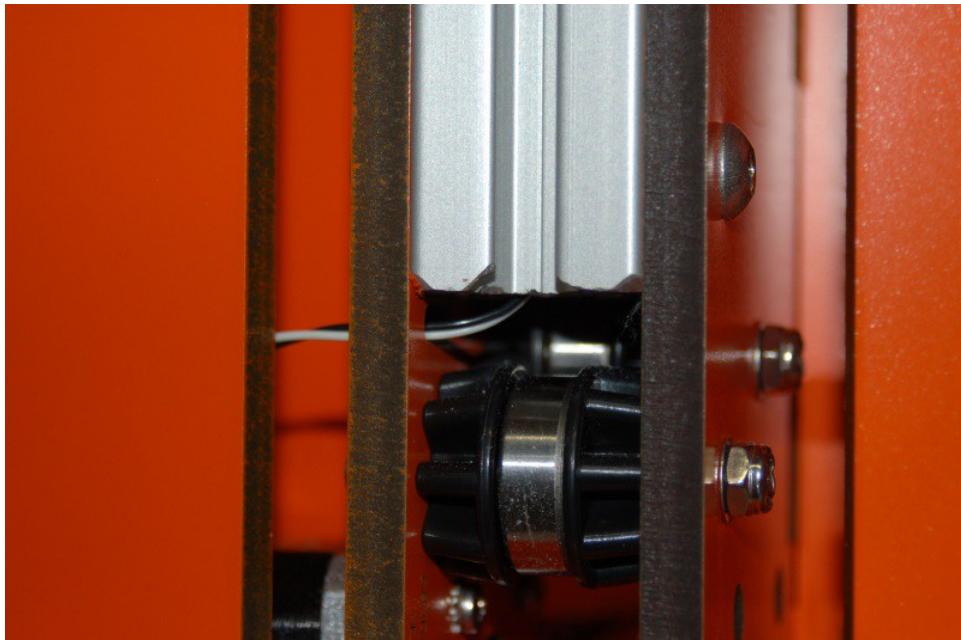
Routing the end stop wires through the Tri-Support. (Step #4)
